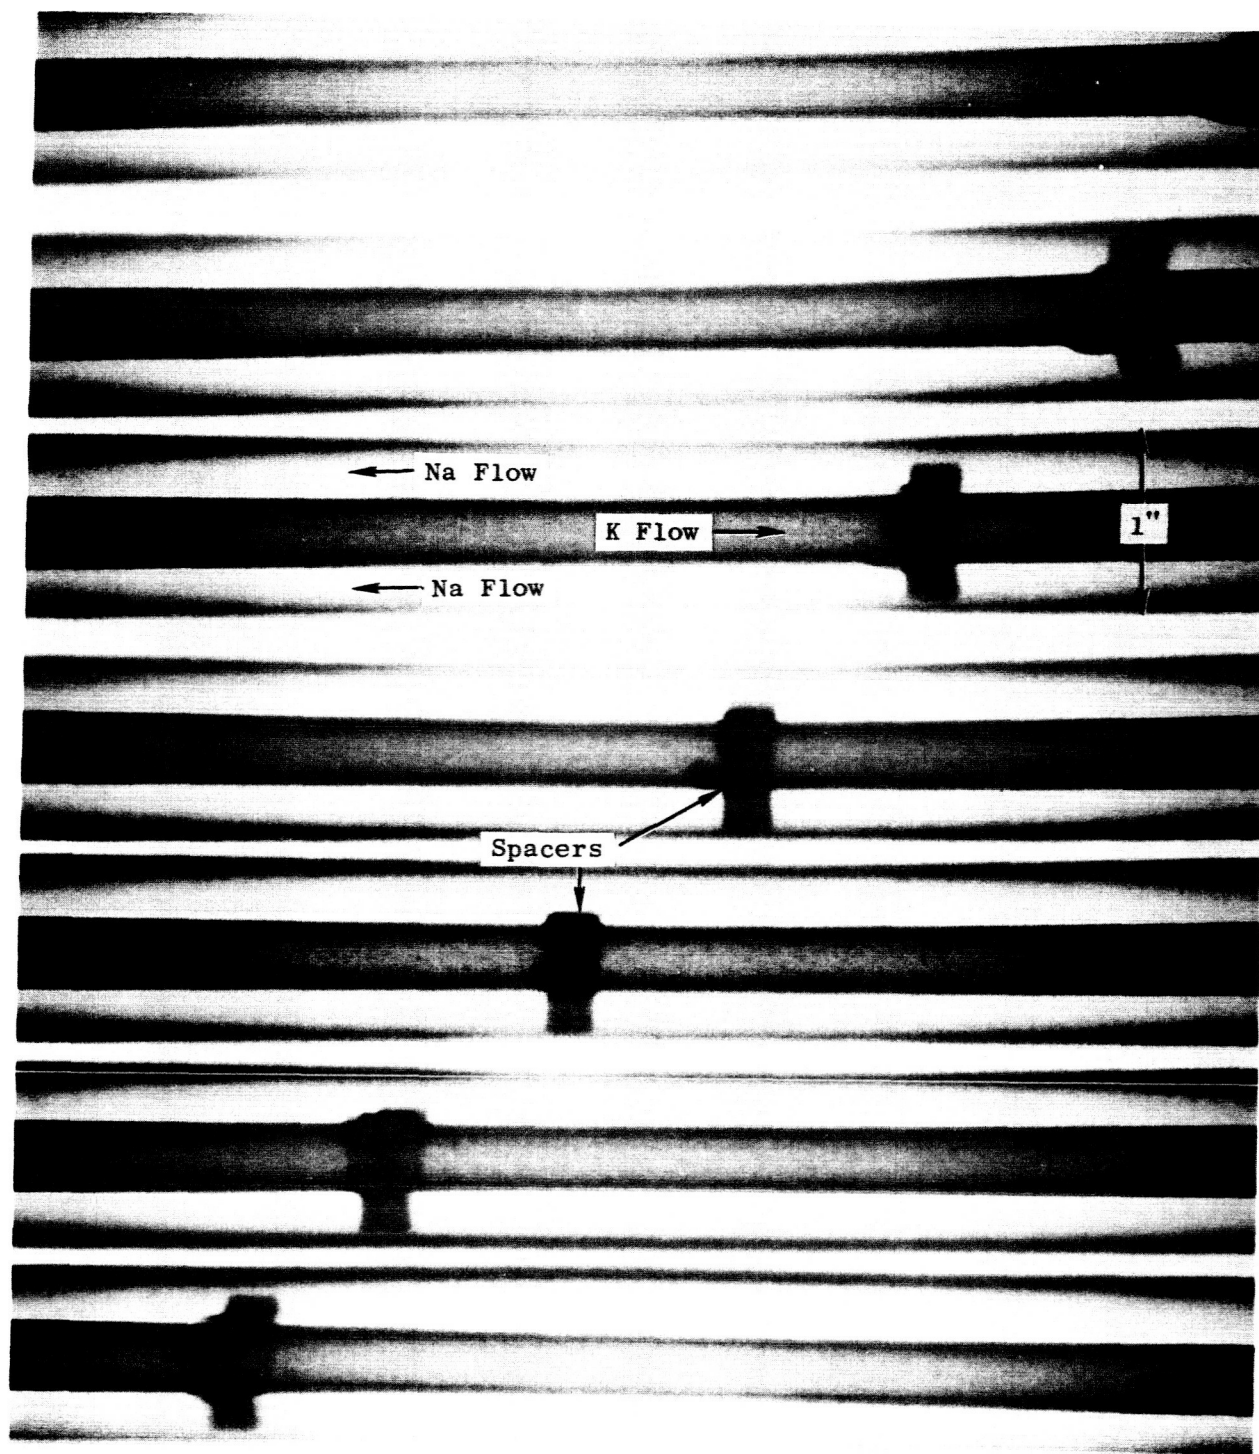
Radiograph of Prototype Corrosion Loop Boiler Coils. Packed Sugar was Used to Maintain Concentricity of Tubes During Forming.
